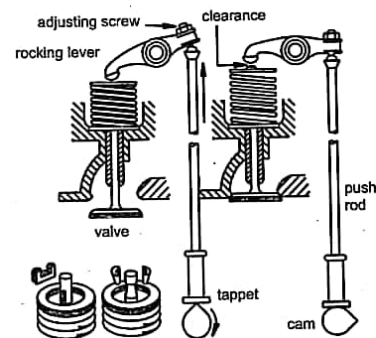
Valve and tappet arrangement in a 4-stroke engine.
